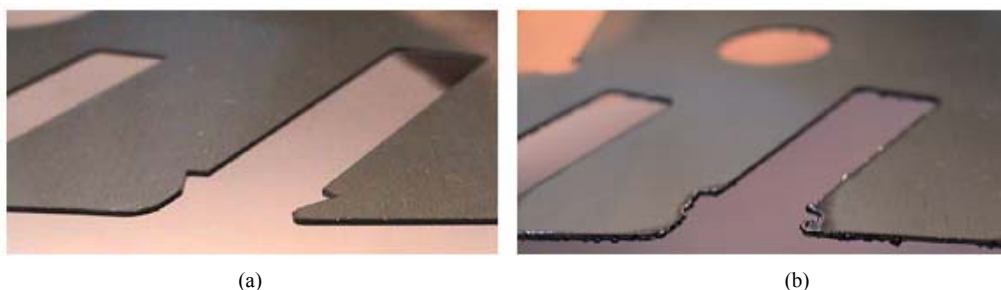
Photography of the cutting kerfs: (a) By using a cyclone slag separator; and (b) By traditional laser cutting technology^[35]
